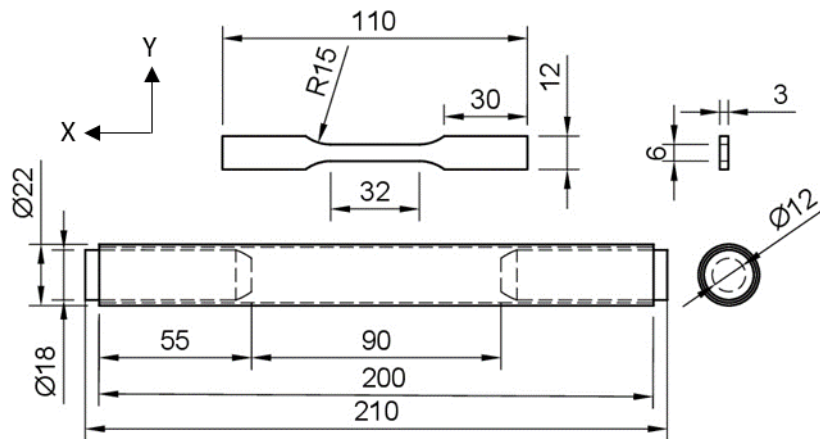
Drawings of the specimens used for tensile testing BMD SS316L and CD wrought SS316L (top), and SA wrought SS316L with snug-fitting metallic plugs (bottom). The extrusion direction of the tube is in the X axis. Units in millimetres.
